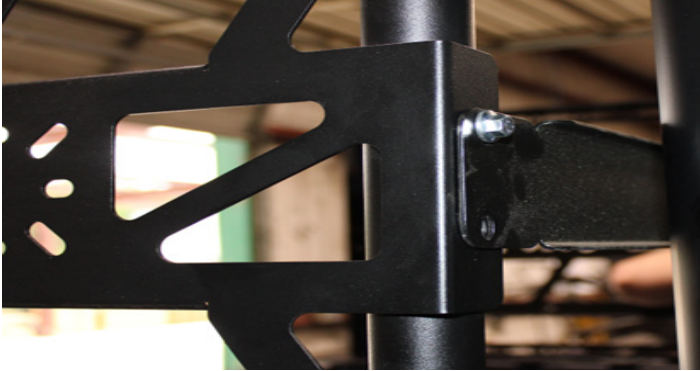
Rear Brace (14) Connects Driver & Passenger Side
